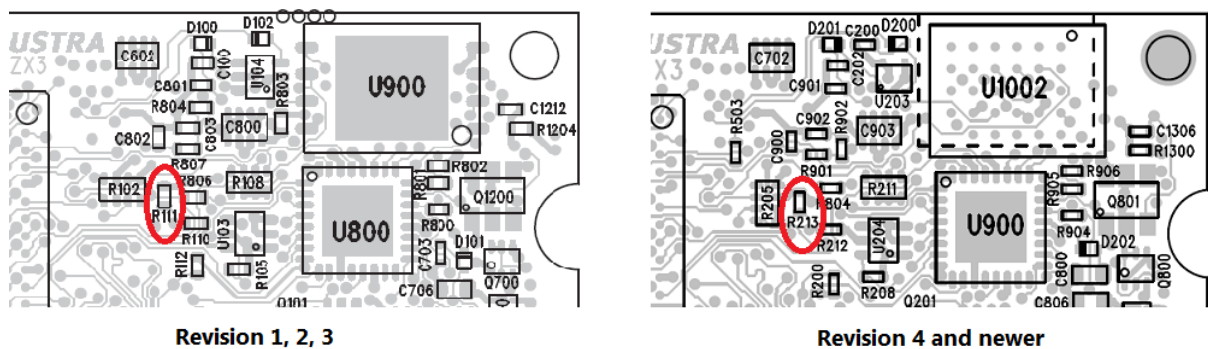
Boot Mode Resistor - Assembly Drawing Top View (Refer to Section 2.5 for the latest Assembly Drawing)
